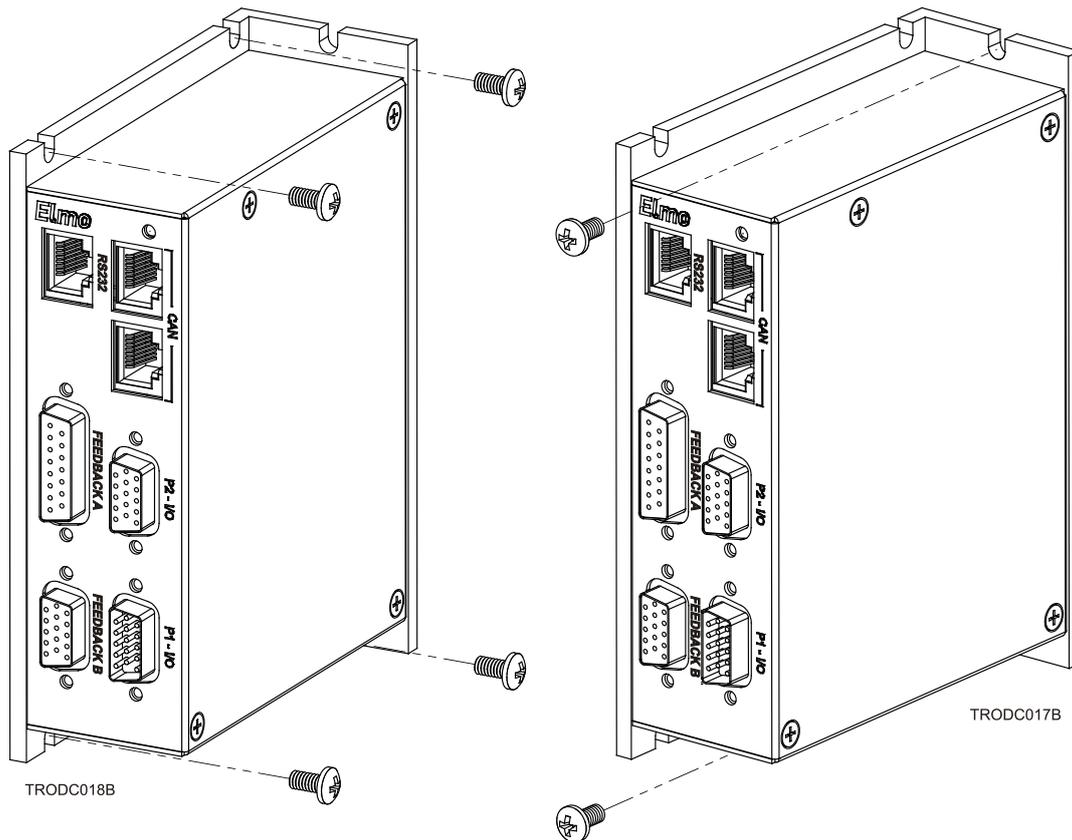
Mounting the DC Trombone with L-shaped Heat-sink
